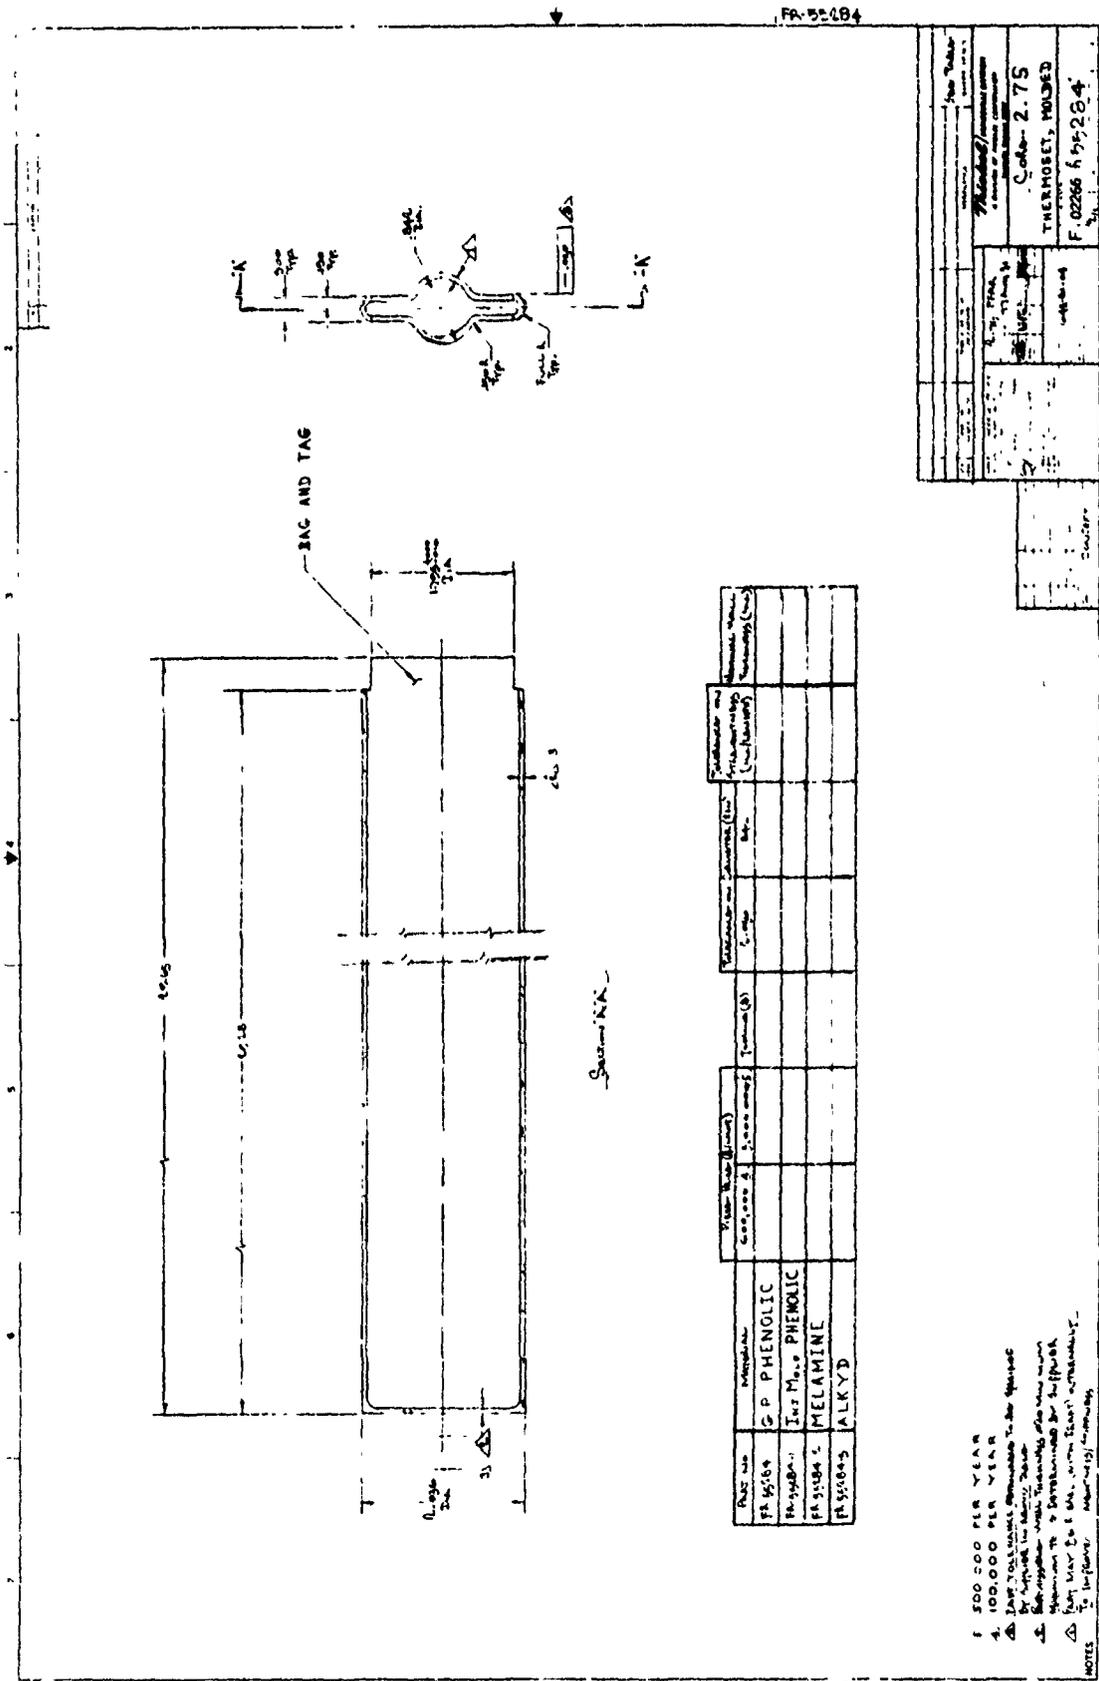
Compression, Transfer, or Inspection Molded Thermoset Core for 2.75 Motor.
